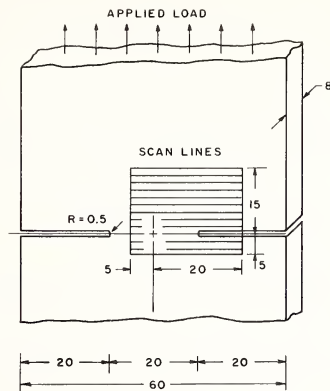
Specimen geometry for double edge notched 6061-T6 aluminum panel showing scanned area dimensions in millimeters.
